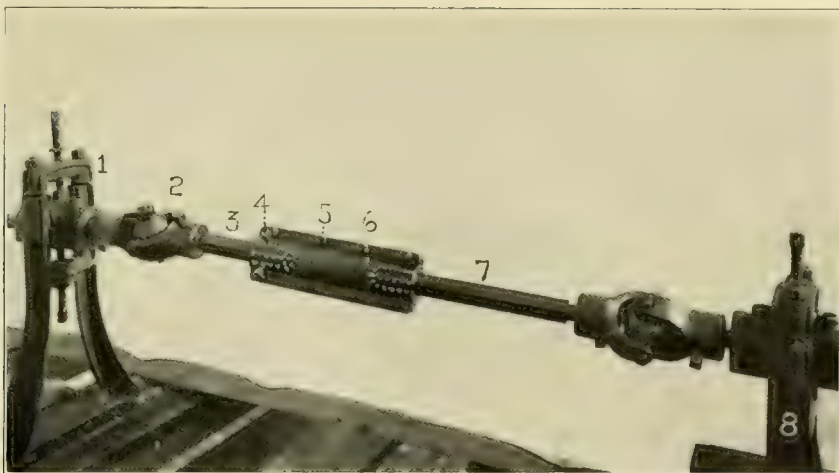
Detail of device for extension and universal movement. 1, adjustable shaft hanger on house boat; 2, ball joint; 3, square shafting, fastened by set screws into ball joint at left, and also (4) into sleeve; 4 and 5, screws through flanges of sleeve; 6, oil holes; 7, square shaft which slides in and out of sleeve; 8, shaft hanger upon side float.
